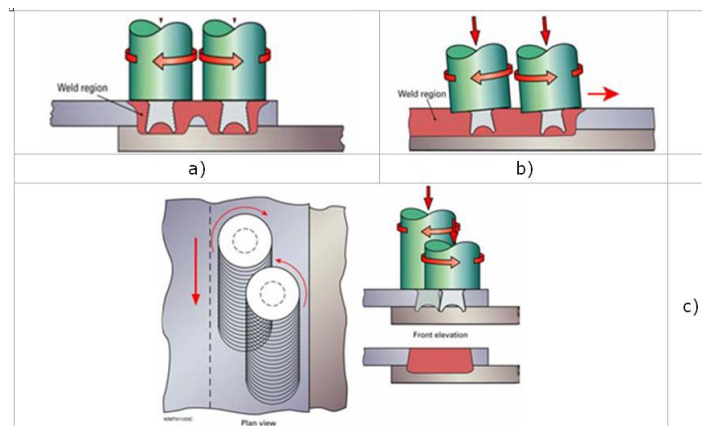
13 Twin-stir™ variants. a) Parallel side-by-side transverse to the welding direction. b) Tandem in-line with the welding direction. c) Staggered to ensure the edges of the weld regions partially overlap.
